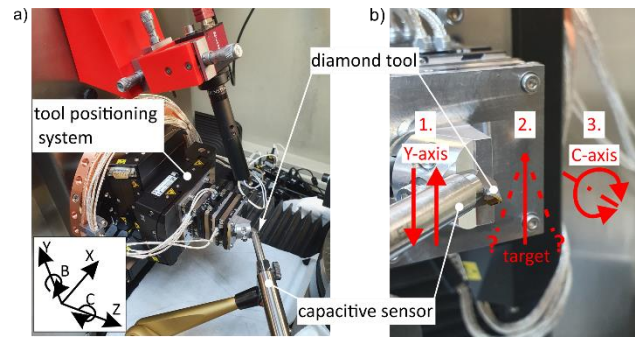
Measuring setup for determining and compensating the tool clearance angle.
